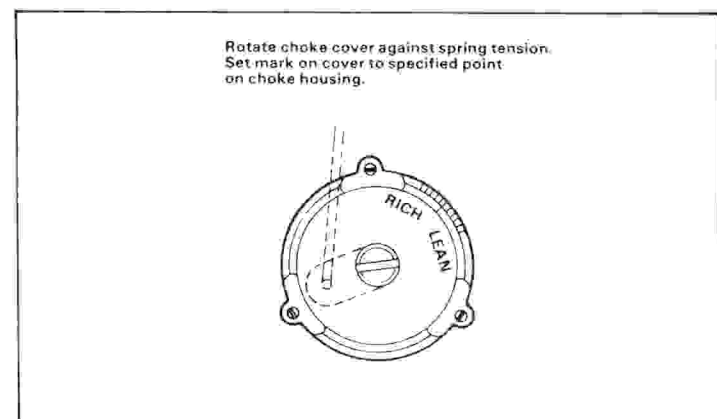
AUTOMATIC CHOKE ADJUSTMENT
